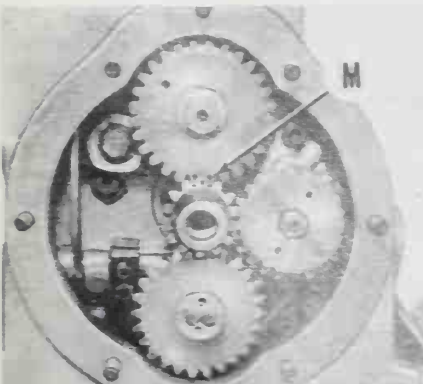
View showing location of timing marks (M) on crankshaft and camshaft gears.
